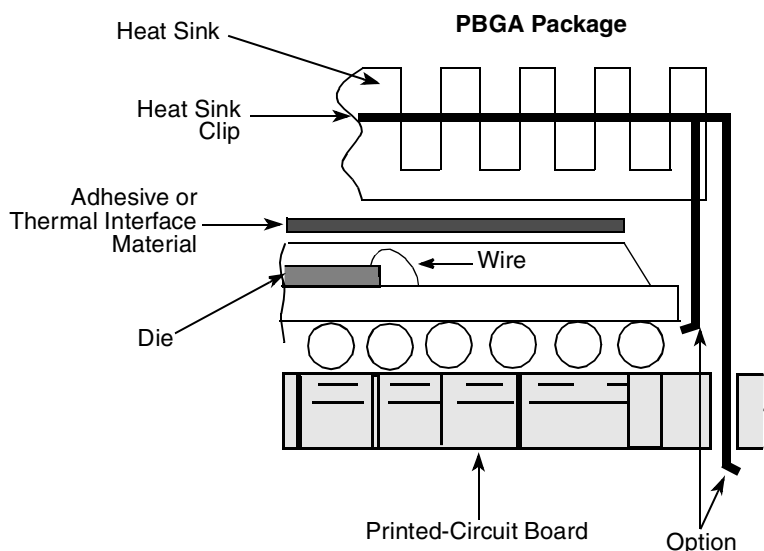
Package Exploded Cross-Sectional View with Several Heat Sink Options
